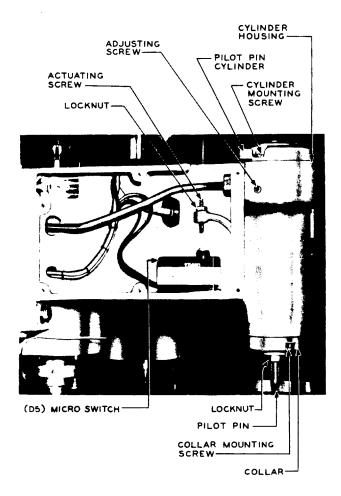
Hole-Enlarging Control Unit — 659A and 659D Tools (cover removed)
